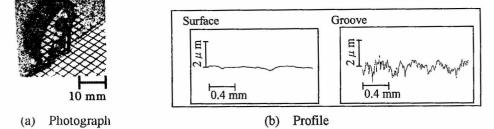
Workpiece with the groove (Ferromagnetic Particle: 115μ m, Work-2: Depth of groove 0.5mm)
